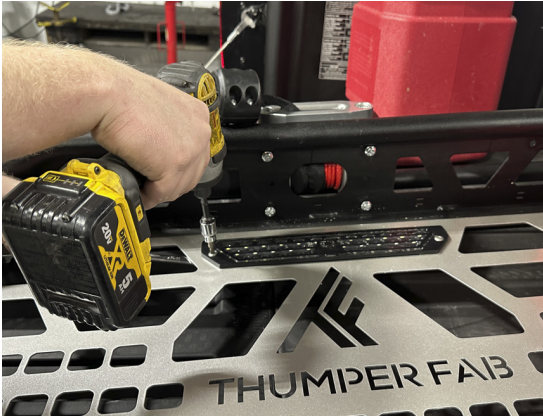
Fasten Rear Cab Light to Insert Panel (2) using a 5/32" Allen and 7/16" Wrench
